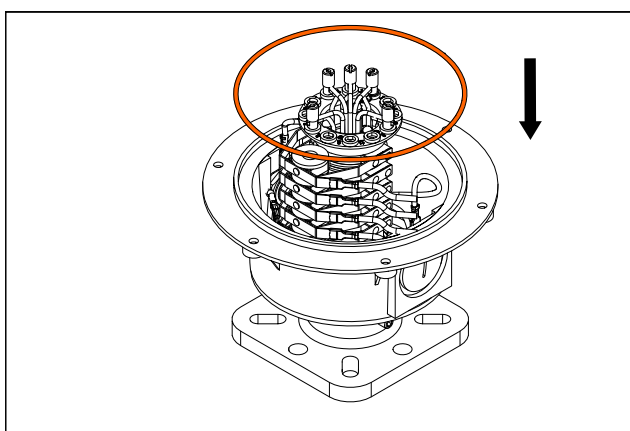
Place the new sealing onto the housing lower part. The surface must be free of dust and grease.
